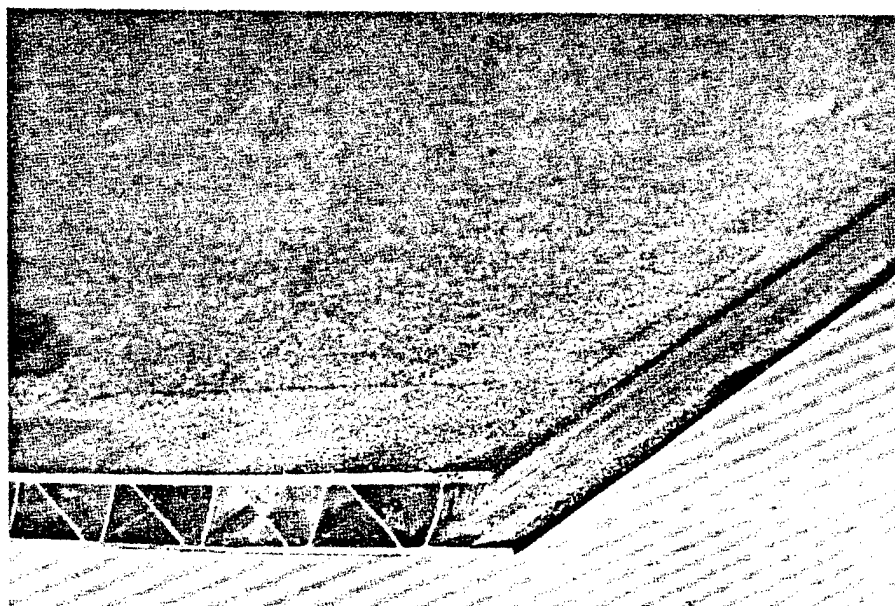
Lower Tank Panel, Trimmed and Machined⁽³³⁾
